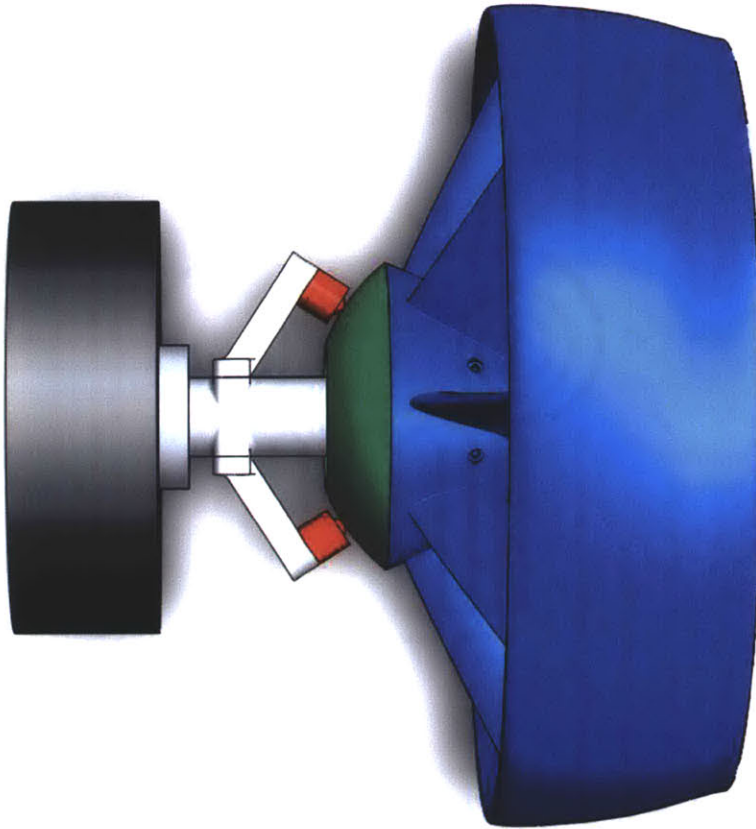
Top view of the spherical floating pivot design. Note that the exterior ball transfers are located in an orthogonal plane to those inside of the spherical housing. This is done to properly constrain the duct.
